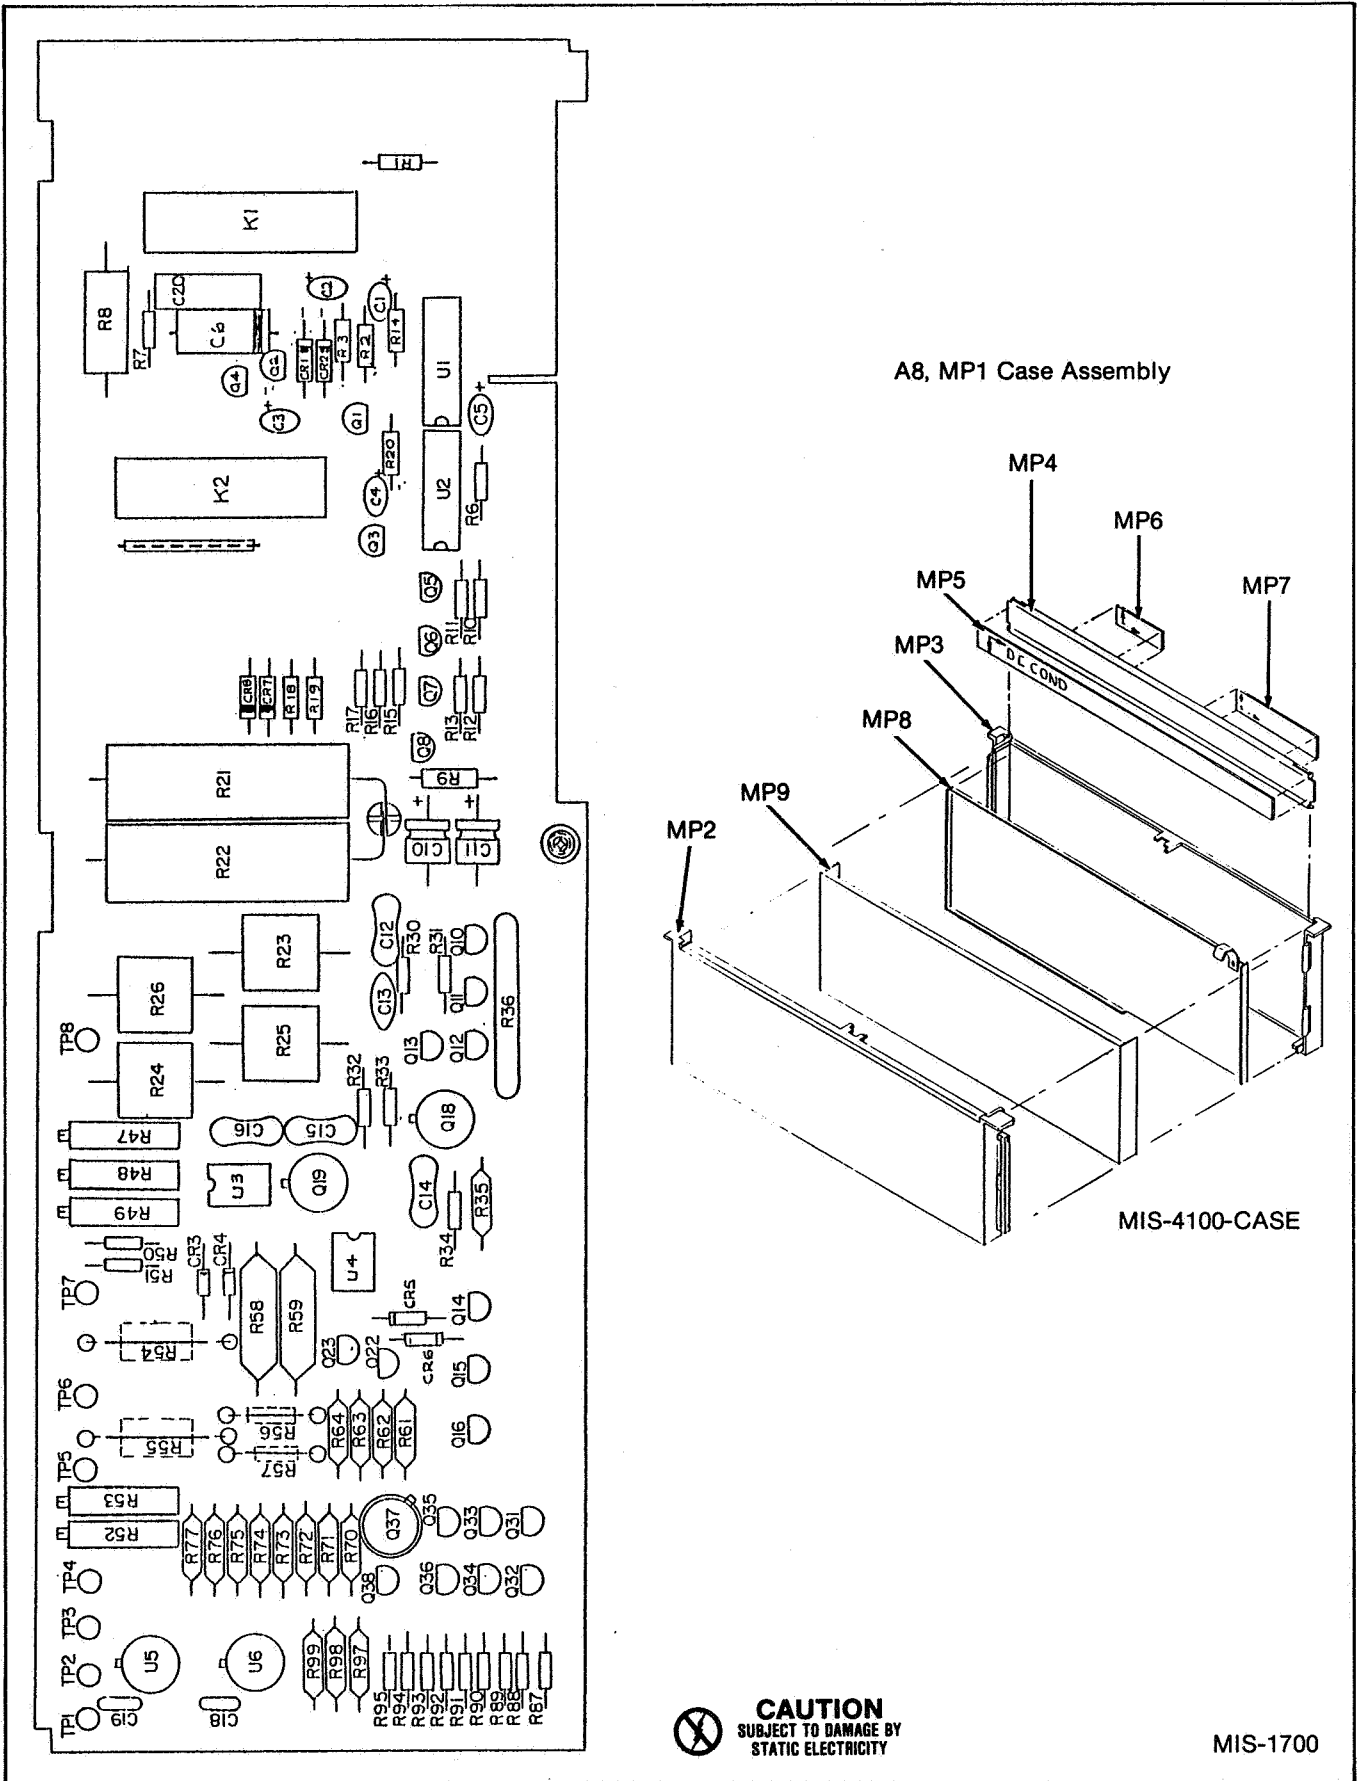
A8 DC Signal Conditioner PCB Assembly
